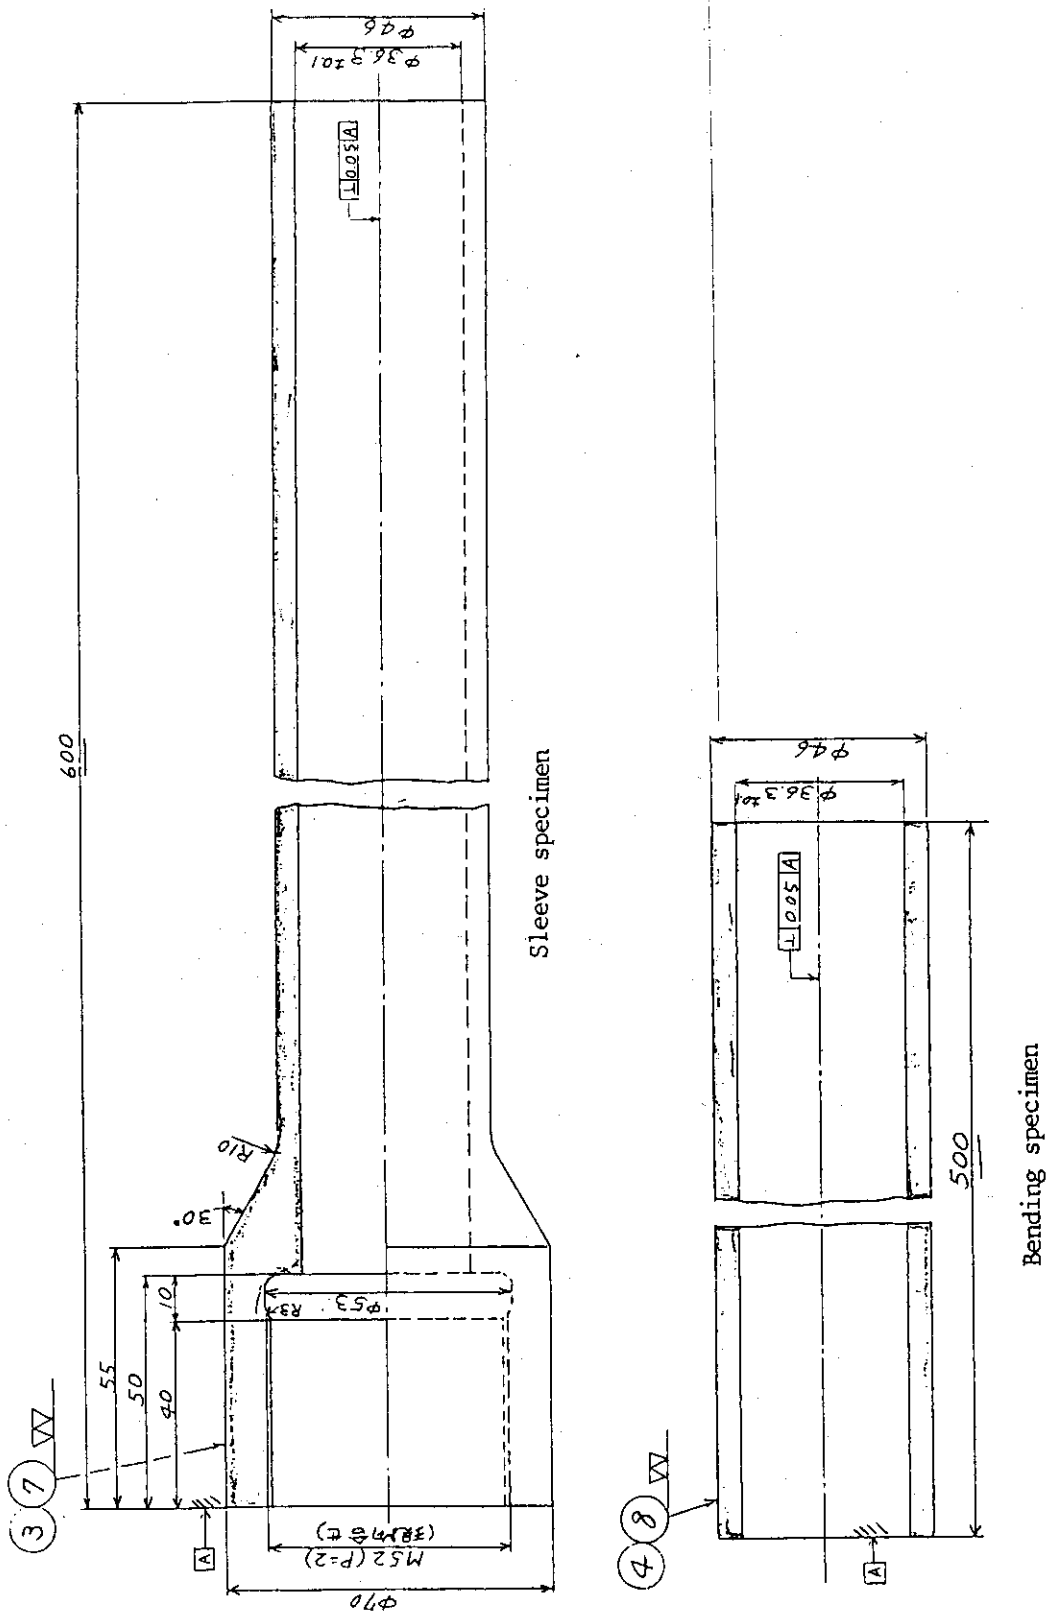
Dimensions of Type II specimen and the hollow tube specimen for bending test.
